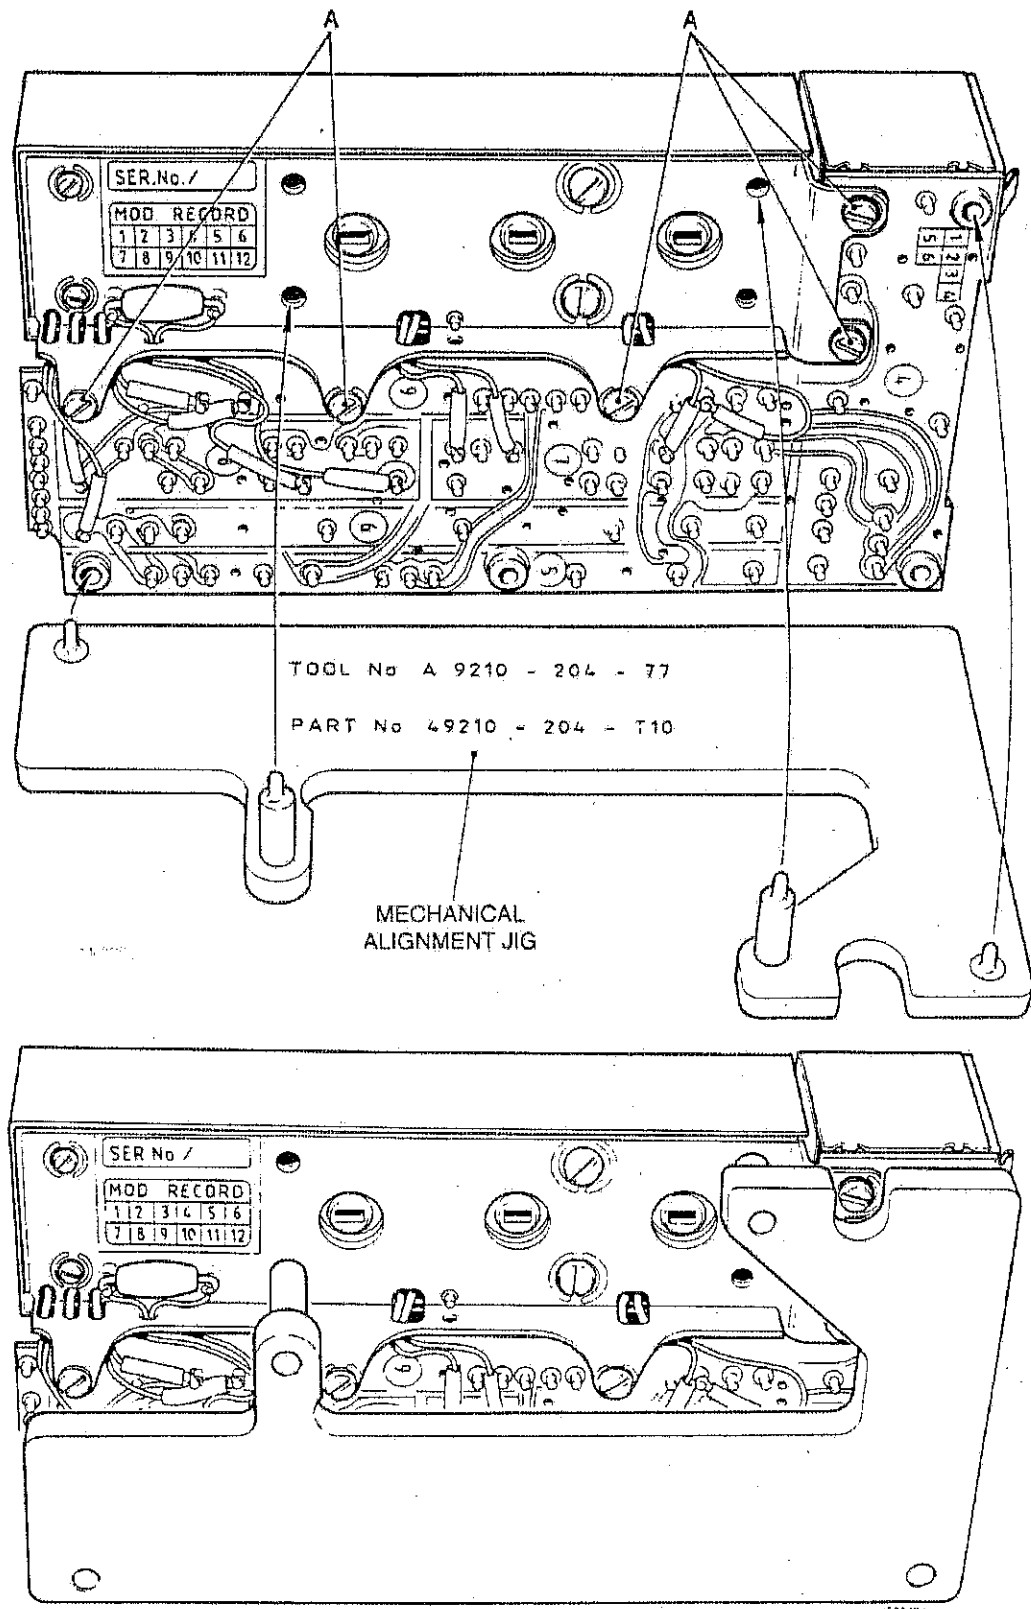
Fitting synthesizer-to-motherboard mechanical alignment jig
